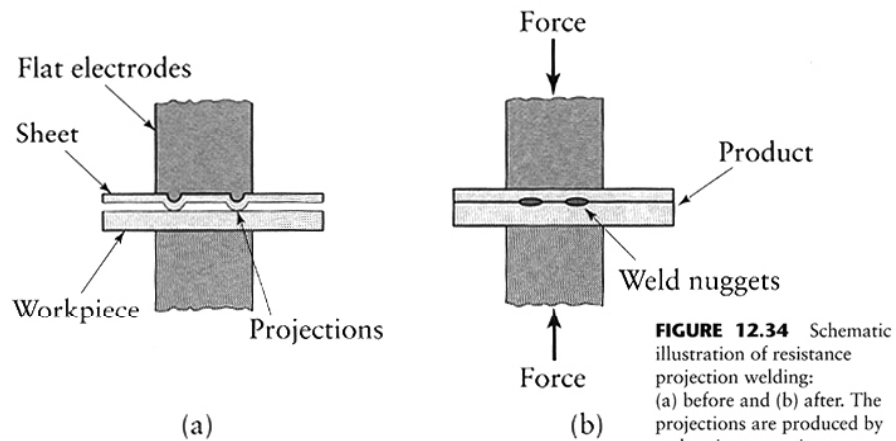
Schematic illustration of resistance projection welding: (a) before and (b) after. The projections are produced by embossing operations, as described in Section 7.6.
